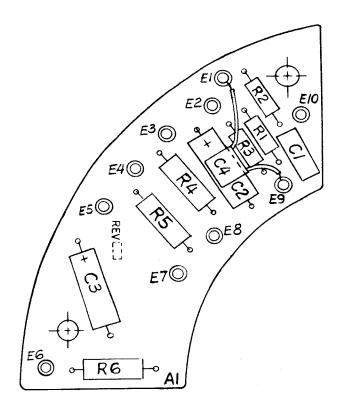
Tuning Rotor Assembly A2A4MP47, Component Locations
